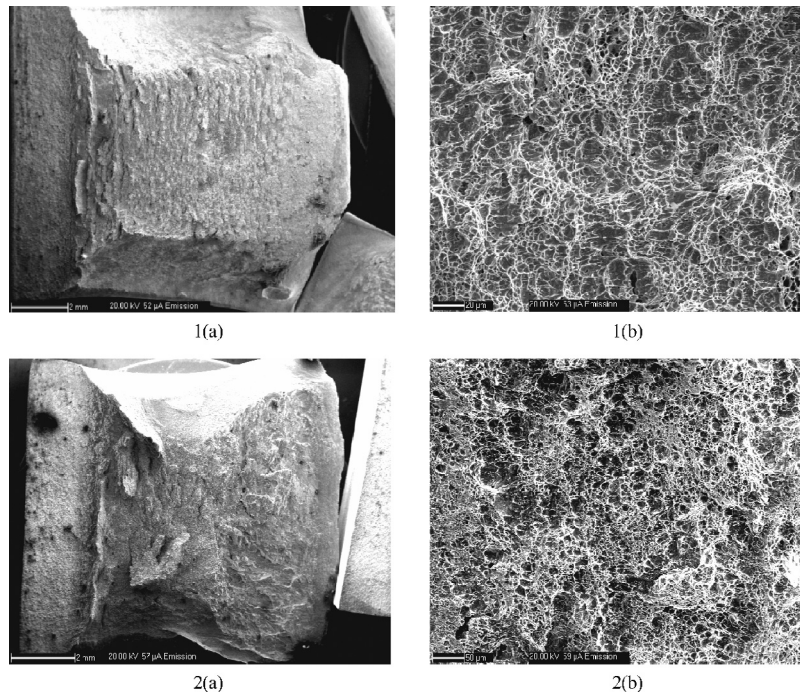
Fractured V-notch Charpy impact specimen images (1) SMAW (2) A-GTAW.
